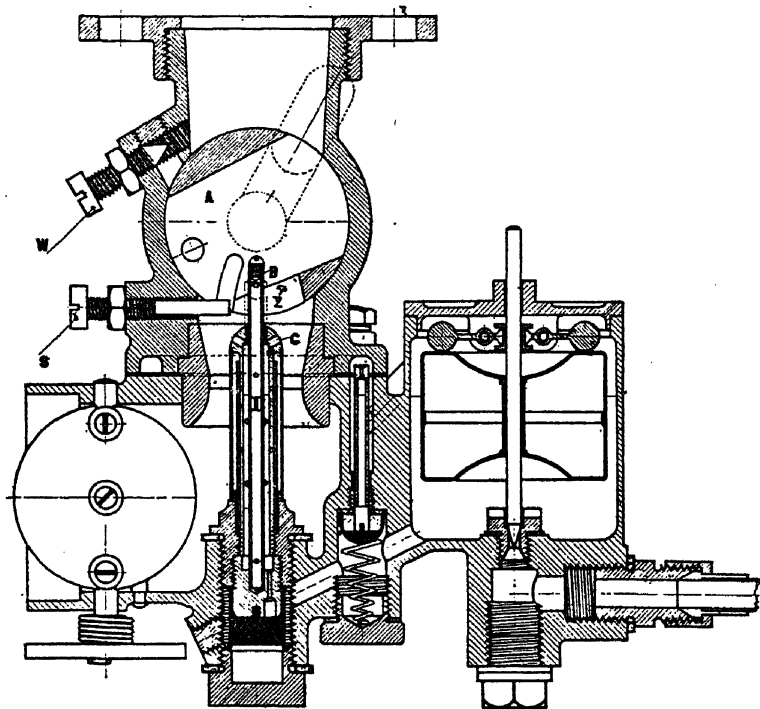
The "Z" type Claudel-Hobson Carburettor.
